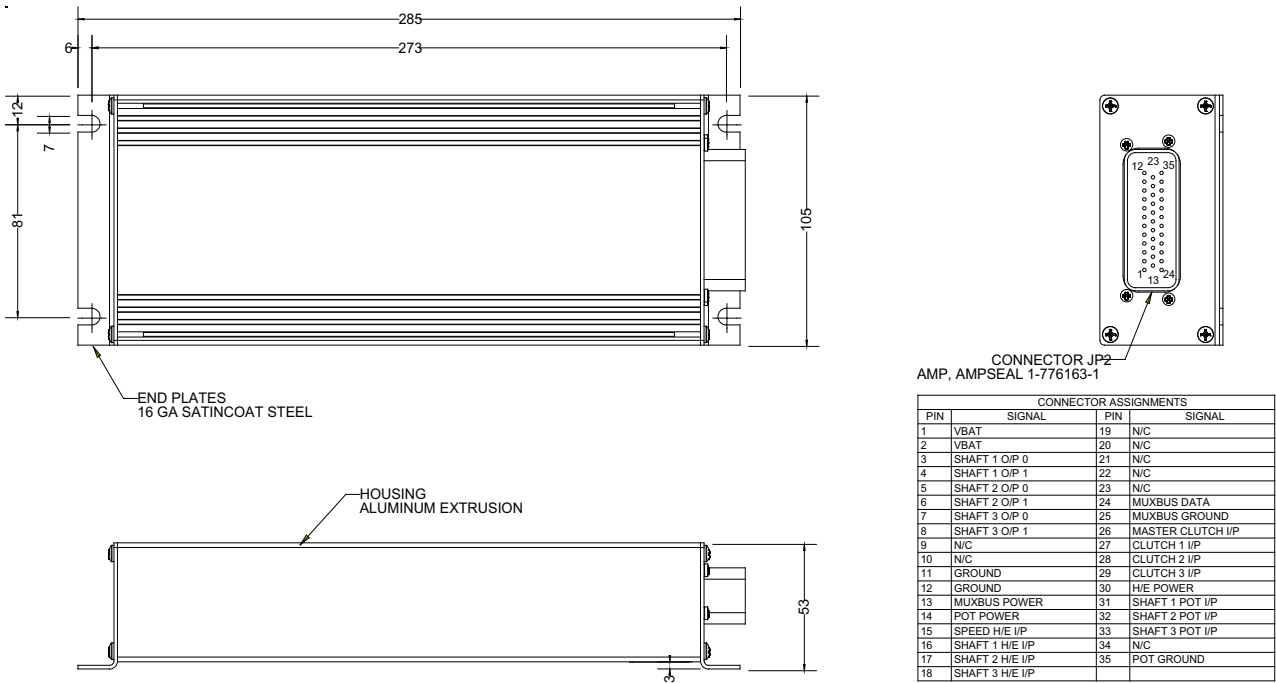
VR Controller Module (On the AIR SEEDER Chassis) - 3130-30
